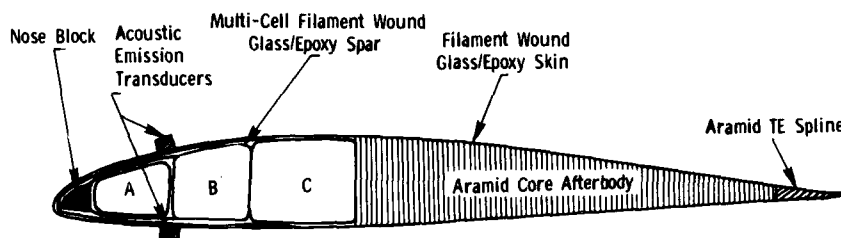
BLADE CROSS SECTION SHOWING PLACEMENT OF TRANSDUCERS
